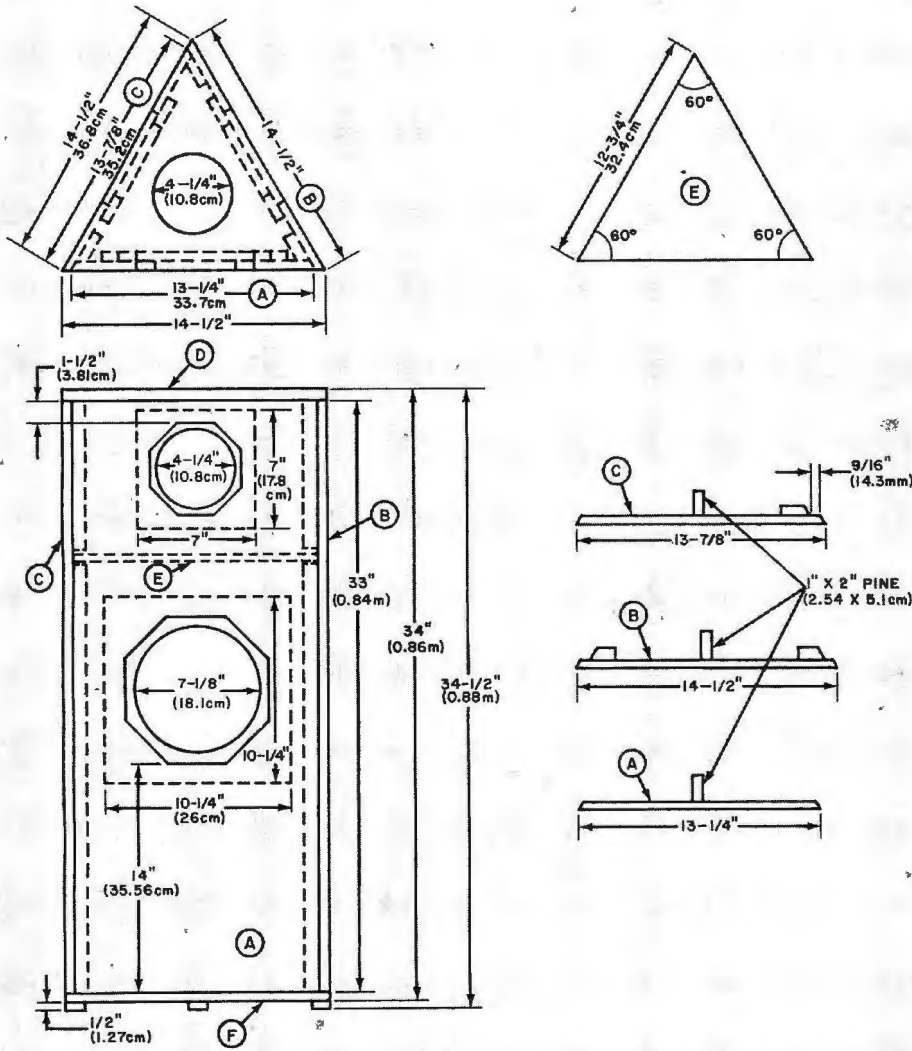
Enclosure shape is triangular. Drawings show dimensions and details.
